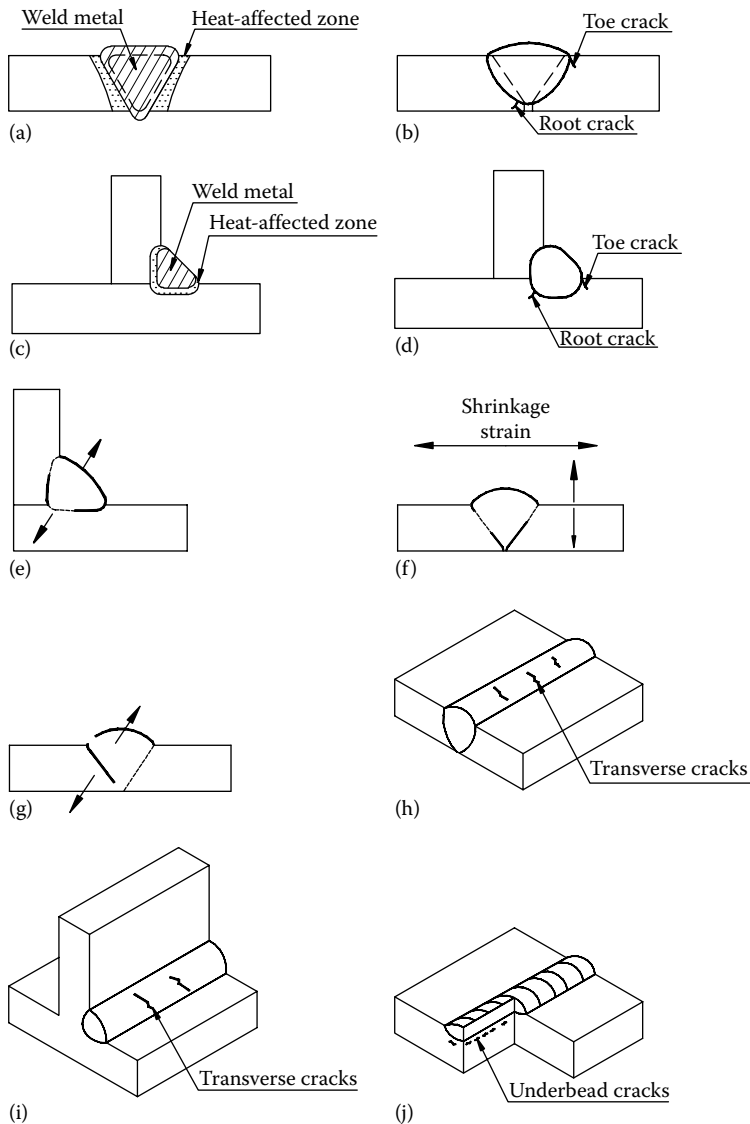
Forms of cold cracking. (a) Weld metal and HAZ, (b) toe and root crack, (c) weld metal and HAZ, (d) toe and root crack, (e, f, and g) hydrogen-induced cracking, (h and i) transverse crack, and (j) underbead crack.
